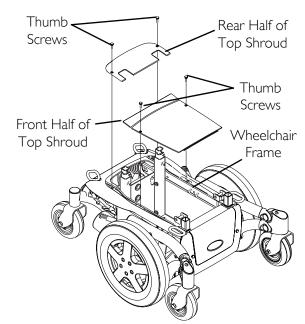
Removing/Installing the Top Shroud - Wheelchairs without Elevating Seat
